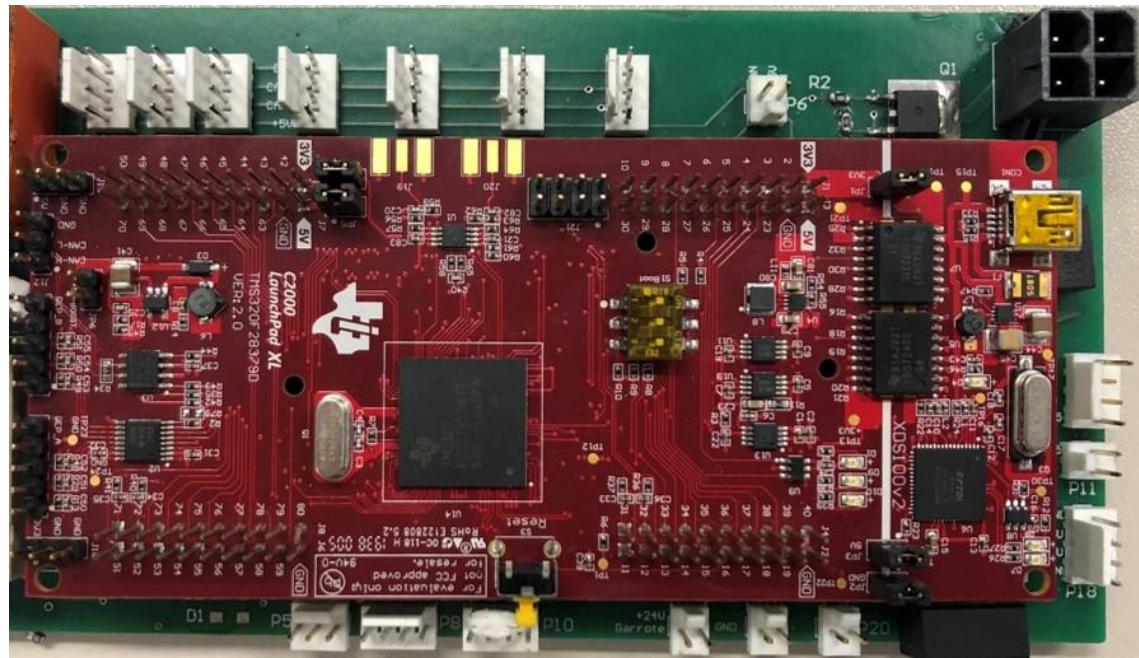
First prototype of the BMS master. Assembly of the LAUNCHXL - f28379D
